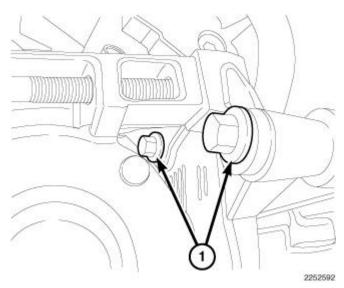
Upper A/C Mounting Bracket Bolts Courtesy of CHRYSLER LLC
